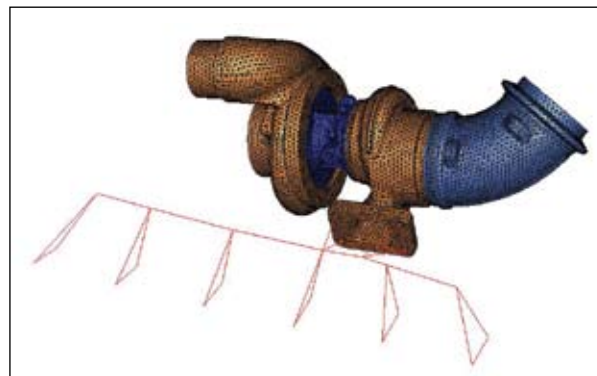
The Hybrid equivalent of the turbocharger assembly depicted in Figure 1
